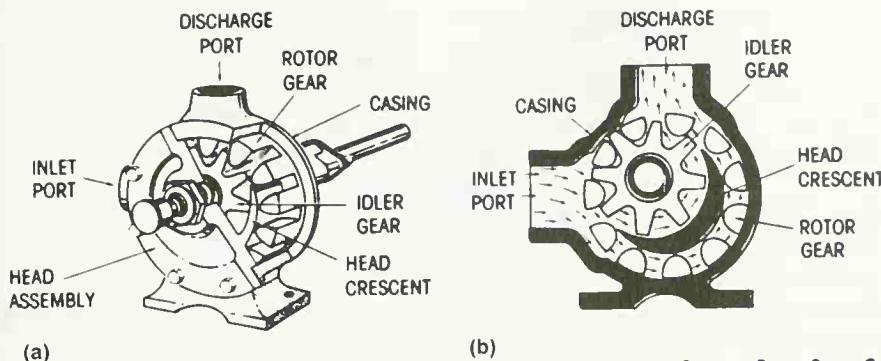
Basic parts and principle of operation of an internal-gear type of rotary pump. (a) Cutaway view showing basic parts. (b) Principle of operation.
